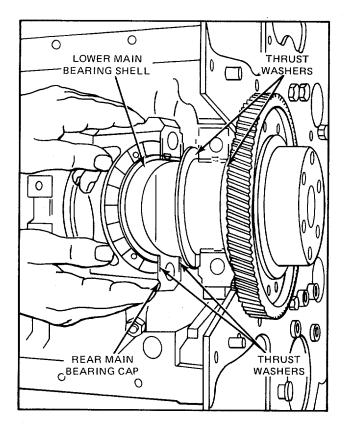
Crankshaft Thrust Washers in Place CAUTION
